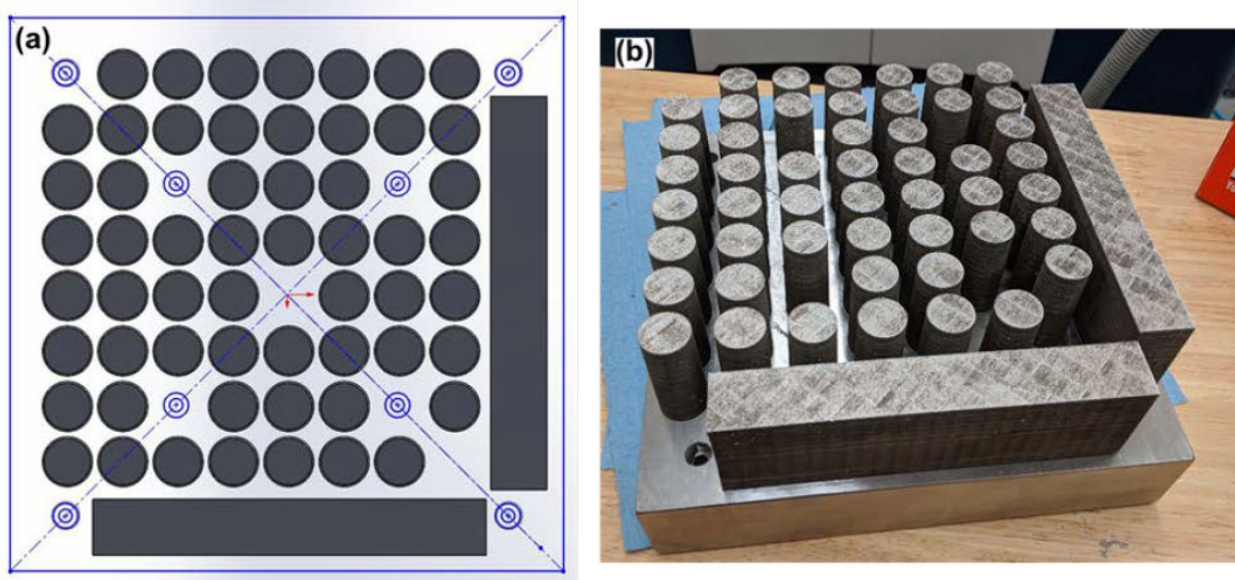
(a) Top view of the design layout for the additive manufacturing of the rollers and tensile bars. (b) Photograph of the final parts on the build plate.
